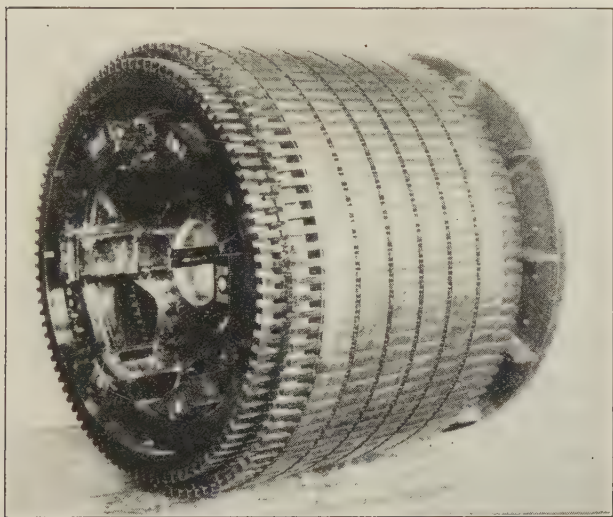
DOUBLE SQUIRREL-CAGE ROTOR
